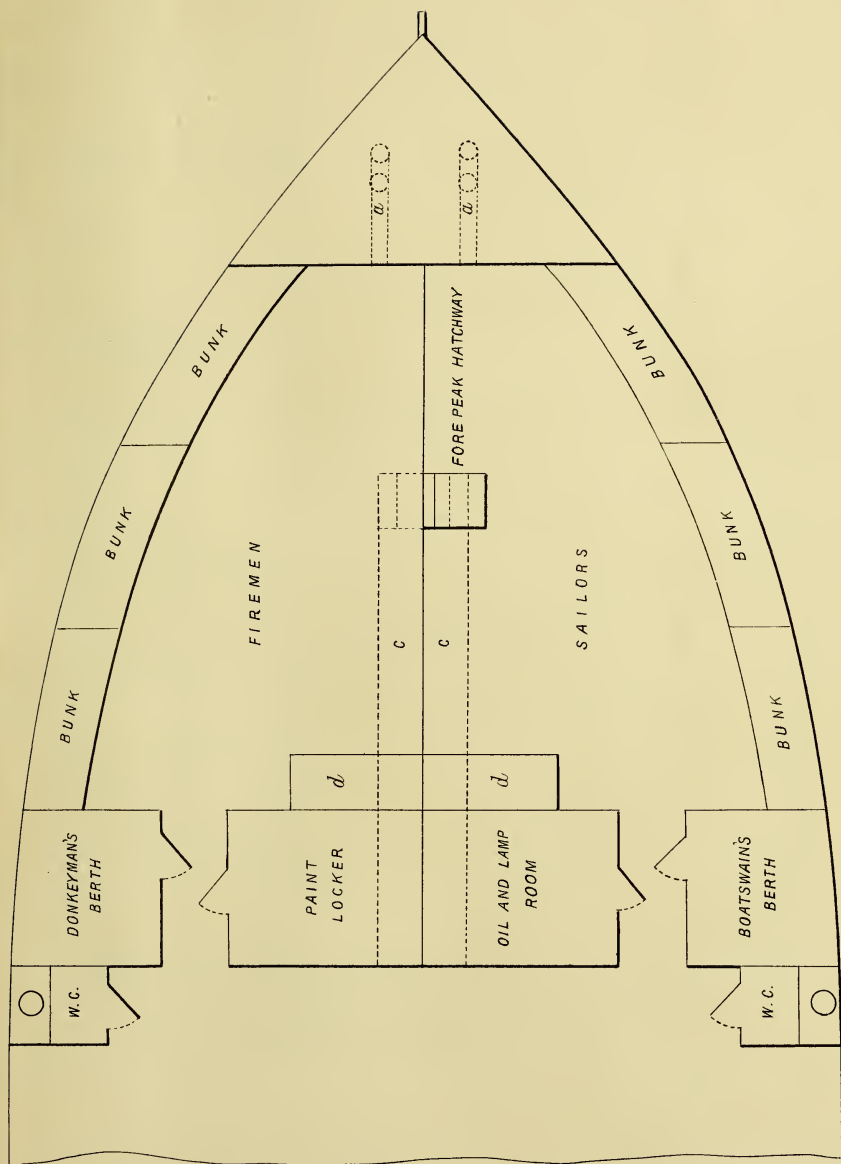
PLAN OF TOPGALLANT FORECASTLE.
